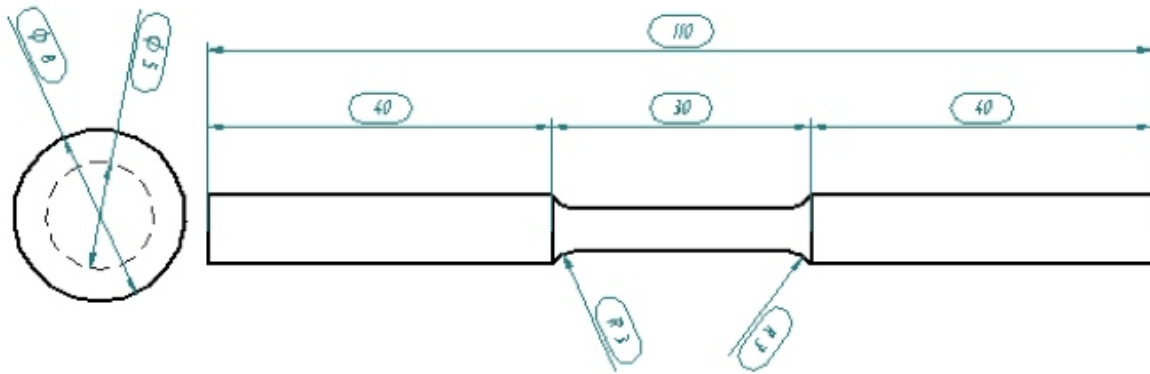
Dimensions of the specimen used in this thesis work.
